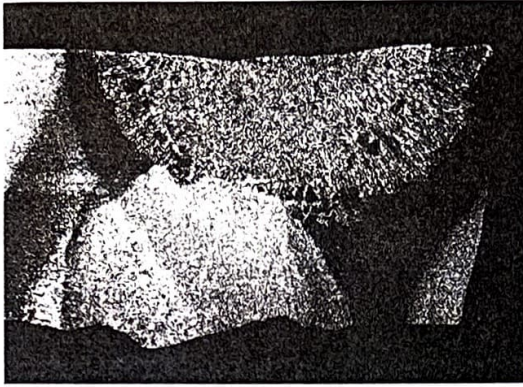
Macrograph of helical laser weld repair. ($\times 6$)
